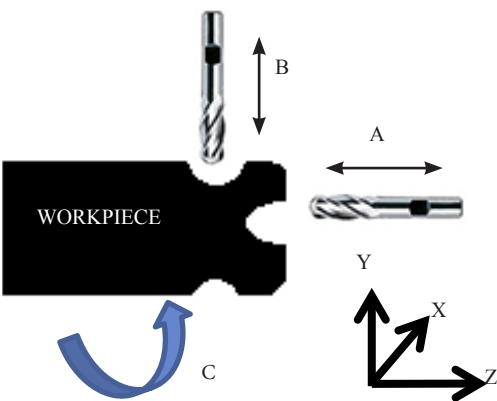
Proposed 4.5-axis machining in CNC Turning Center
